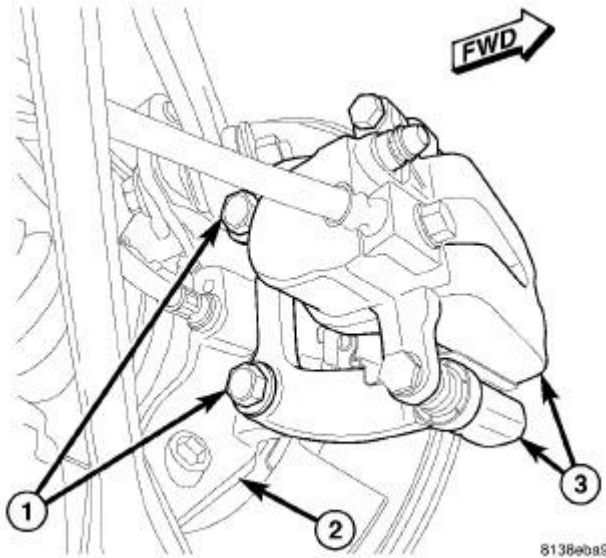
Rear Caliper Adapter, Knuckle & Bolts
